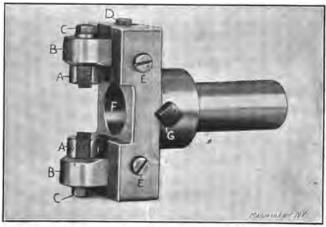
Brown & Sharpe Adjustable Turret Knurl-holder
